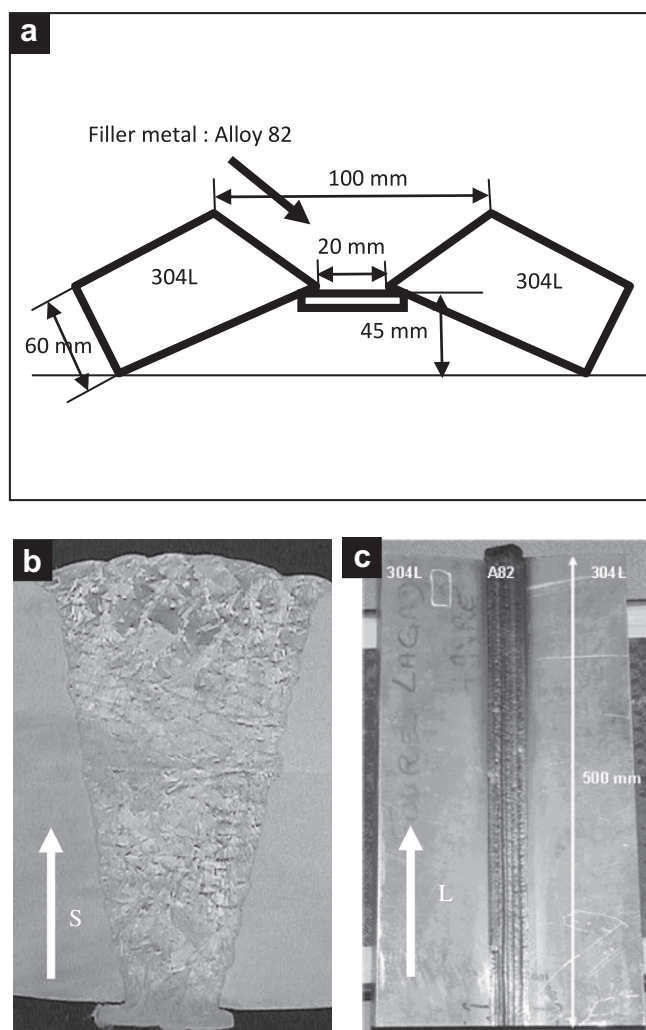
(a) Schematic representation of butt weld manufacturing, (b) cross-section of the butt weld and (c) top view. The *L* direction is the welding direction and the *S* direction is the dendrite growth direction.
